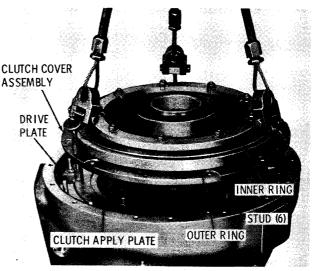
Installing (or removing) clutch cover assembly (VH series)
